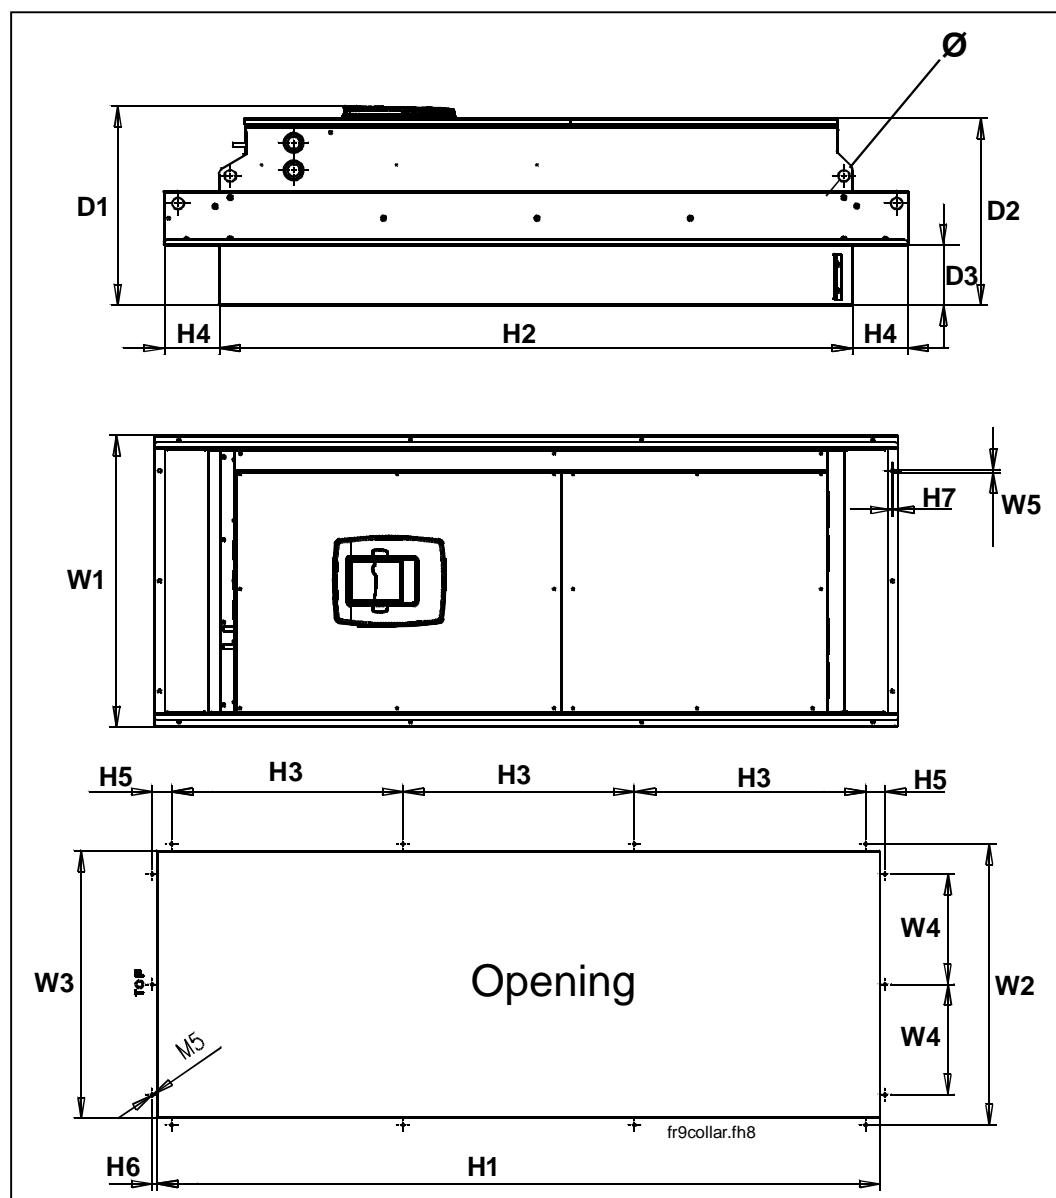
Vacon NX_ dimensions. FR9 flange mounting
